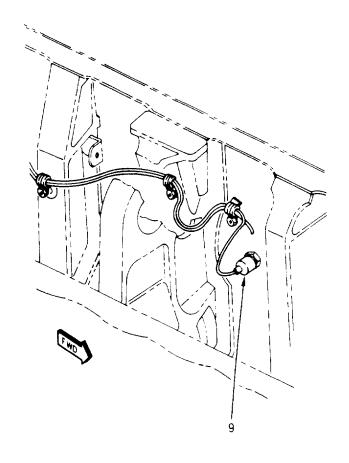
Wing Fuel Transfer System Component Locator (Sheet 3)
